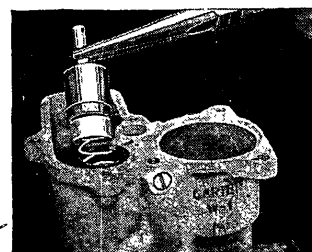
Install pump spring and plunger. Use indexing tool to avoid damage to plunger leather
